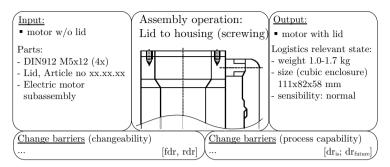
Change barrier and tolerance description of example assembly operation
